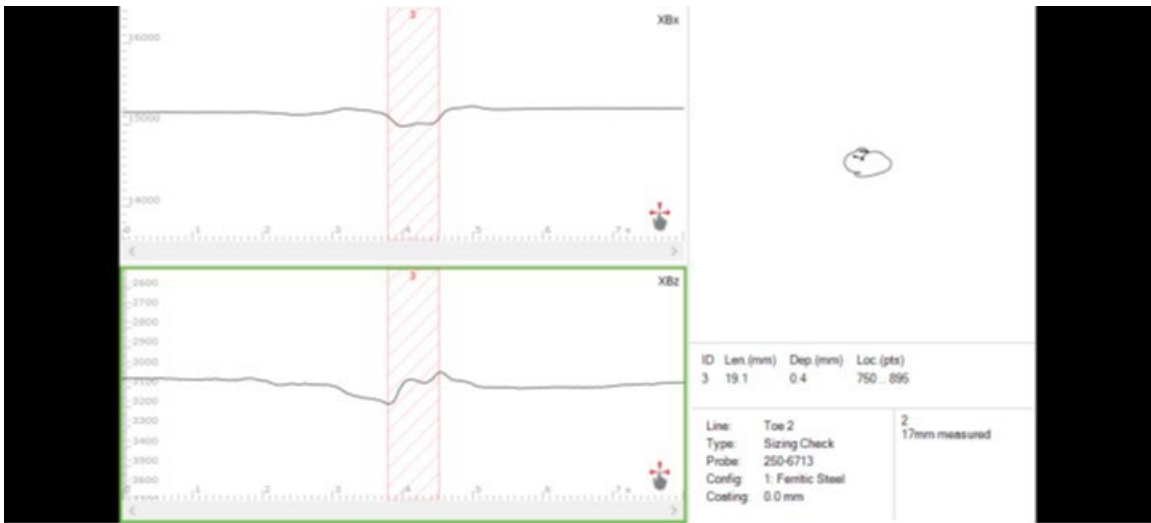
ACFM scan data of Flaw 3 for butt weld MG-6 panel
